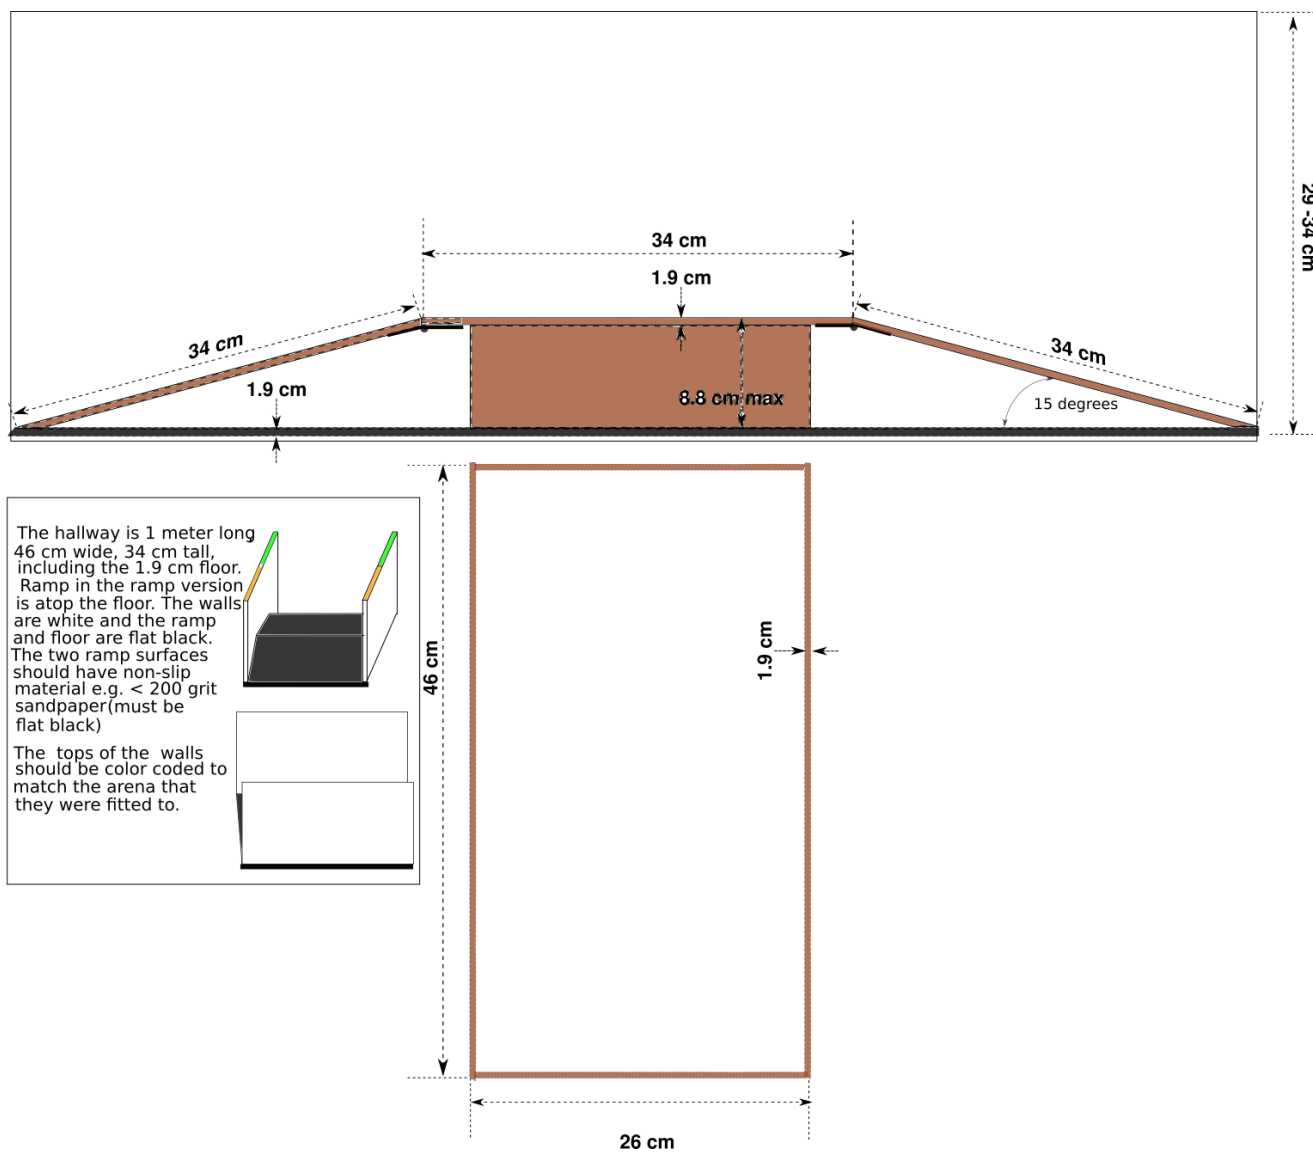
Ramped Hallway Geometry- Central Box (rampAppendix06DEC2015-12-18pngA.png)
